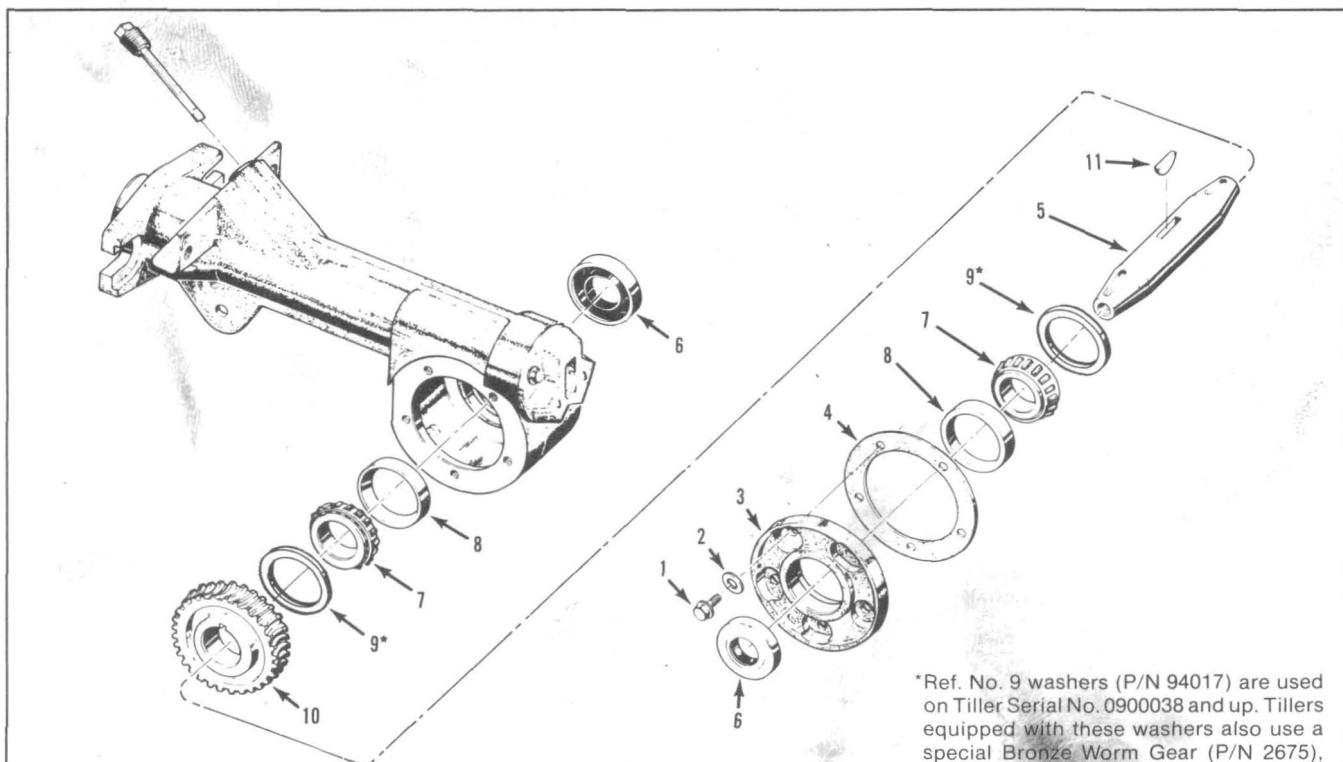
Tiller Attachment Tine Shaft Assembly.
